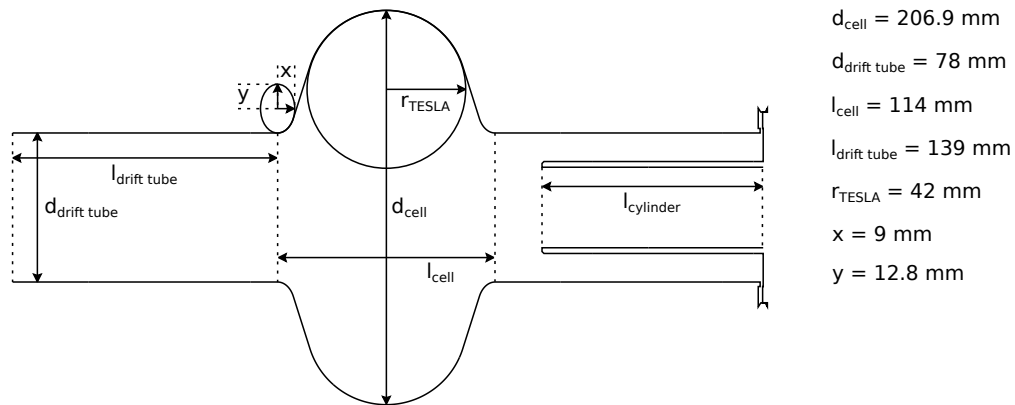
Geometry of the TESLA-shape test cavity with the mounted cylinder insert. Adapted from: [Edw95, p. 122, Figure 4.2]
